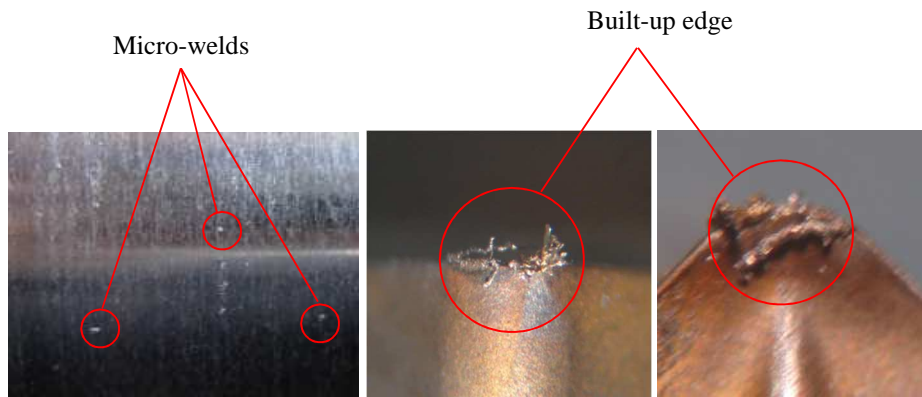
Micro-weld on machined surface and Built-up edge on cutting insert
